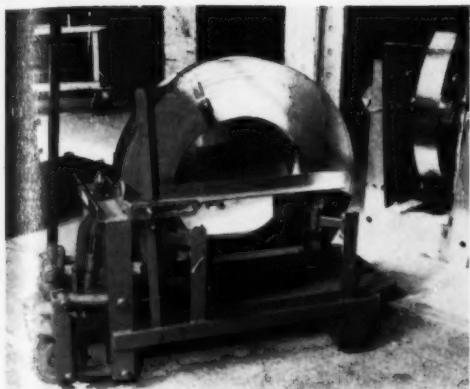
Specially designed coil strip transporter truck incorporating a squeeze clamp device for holding the coil and a tilting platform for delivery of the coil into the press coilholder shown behind the truck
